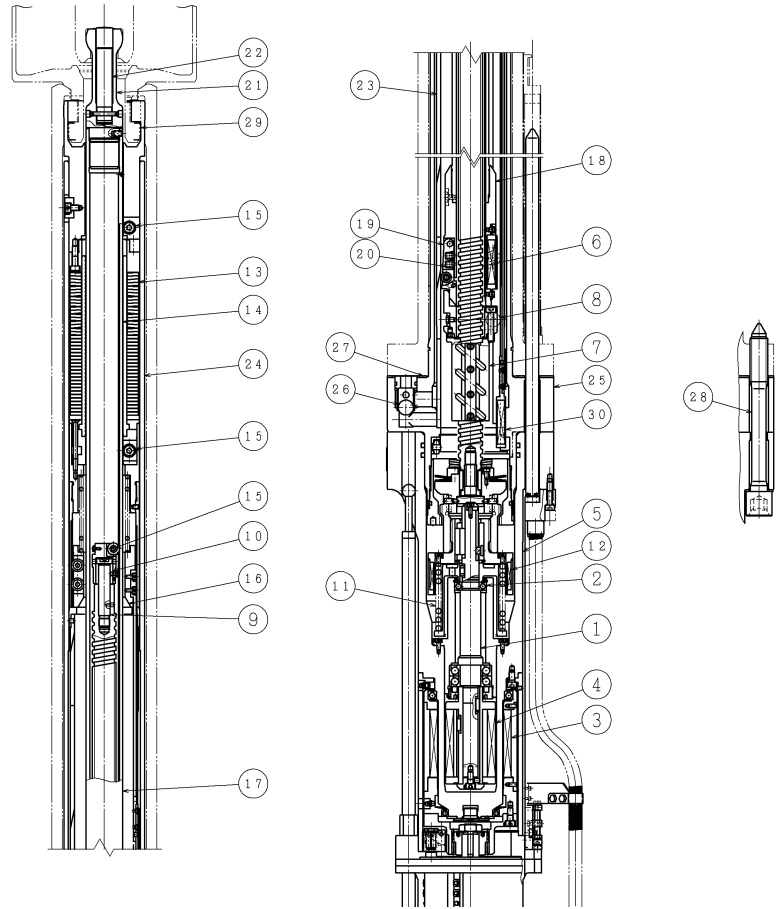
Fine Motion Control Rod Drive Unit (Cutaway)
